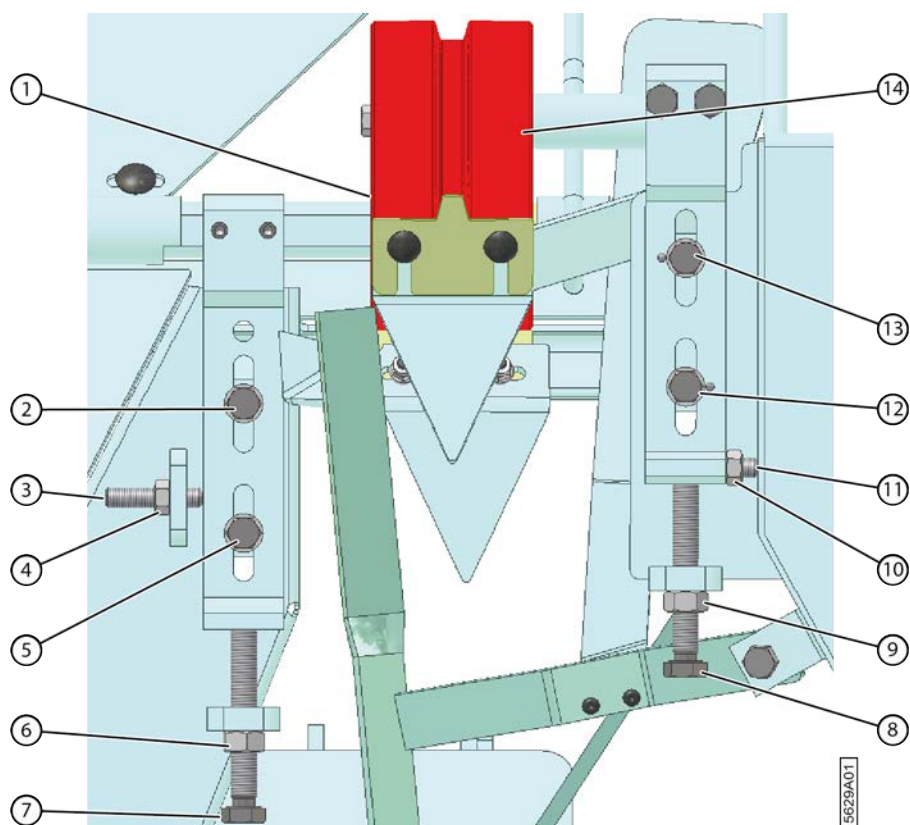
Adjusting the tension of the lowermost outermost picking belt
